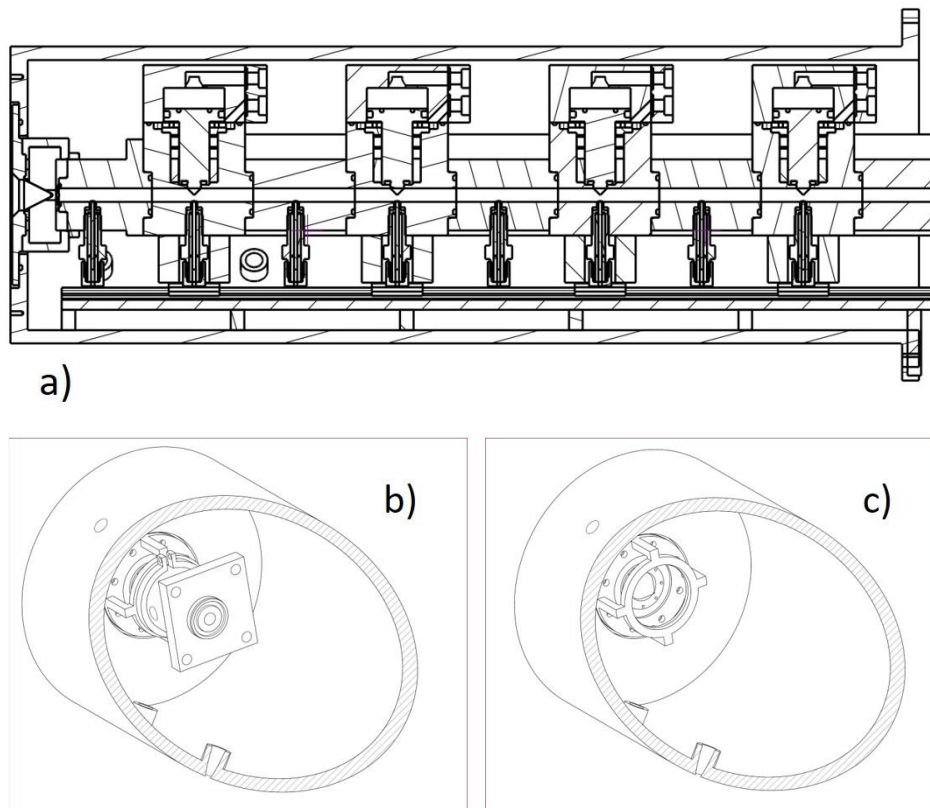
Cross-sectional view of the HRRST inside SAPHIRS showing the mechanical alignment system (a). 3-D section of the chamber showing the HRRST terminal section inserted into the cage (b) and the cage mounted at the end of the chamber (c).
